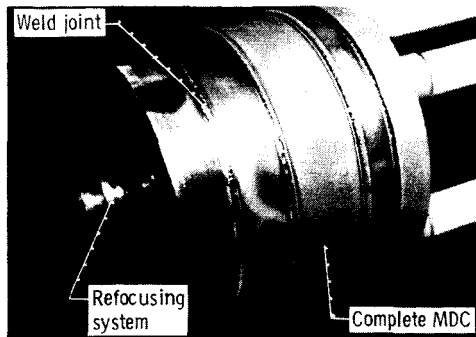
Collector assembly shown with electrode modules stacked and electron beam welded but without finish machining of the outer diameter.
